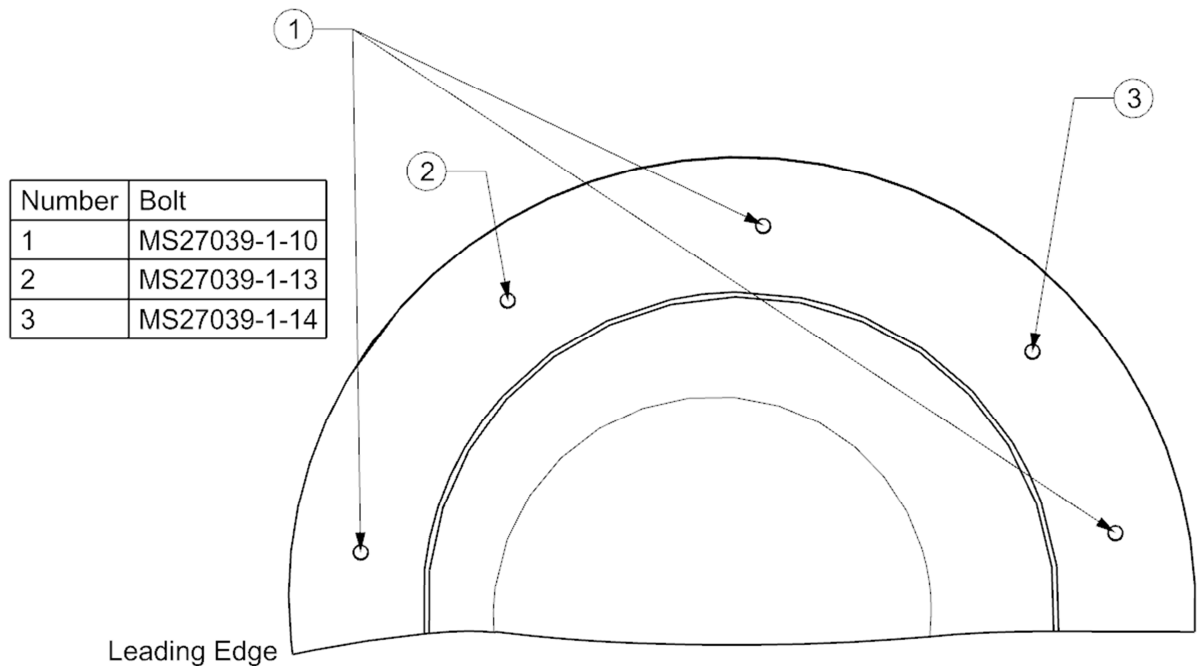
Inboard Wing Pylon Forward Lug Cover Fastener Placement
